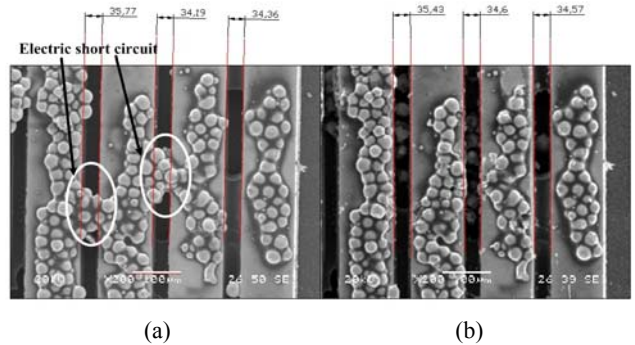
Electric short circuit removal of probe card sample: (a) before removal (b) after removal
